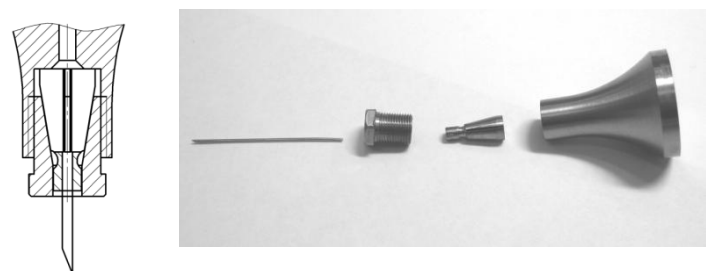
Passive working tool with "back type" collet holder for specifically drilling
